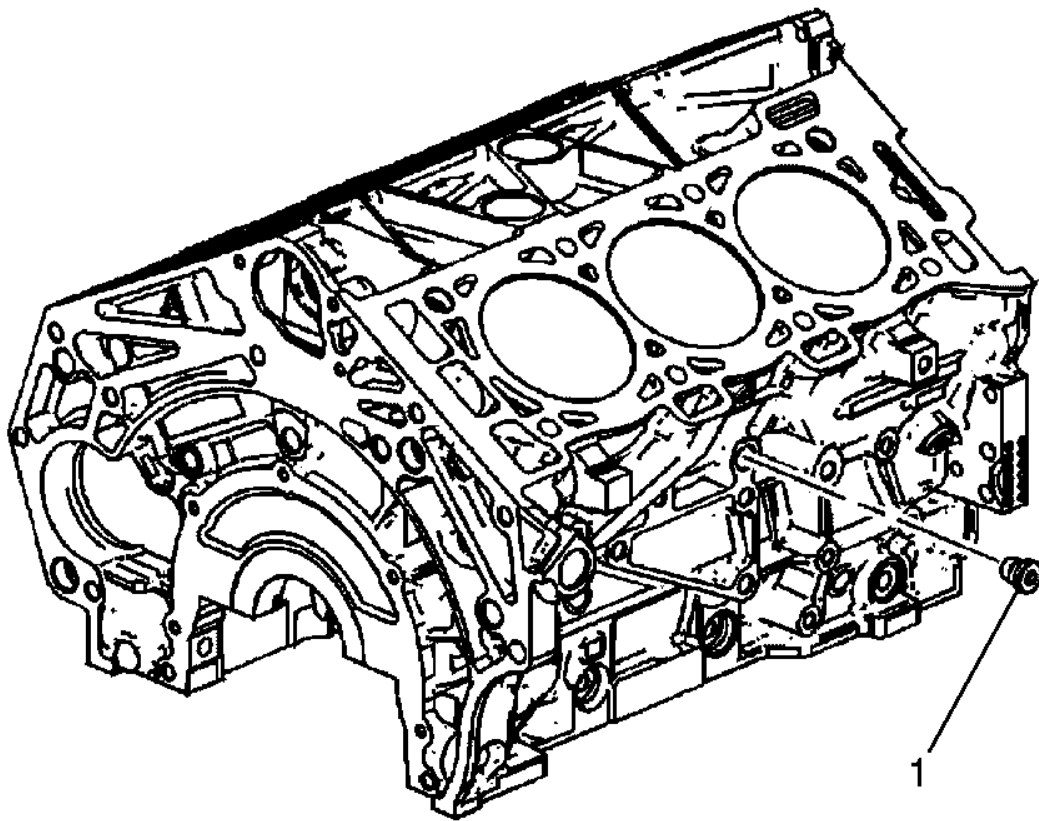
Identifying M14 Left Side Coolant Drain Threaded Plug
